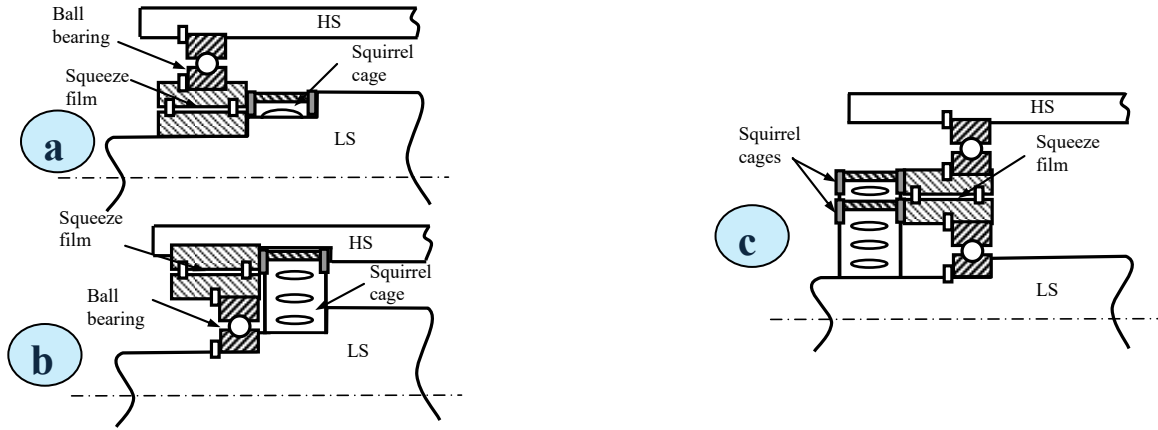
Schematic views of inter-shaft damper configurations: (a) squeeze film rotates with low speed (LS) rotor, (b) squeeze film rotates with high speed (HS) rotor, and (c) double ball bearing-squirrel cage design.
